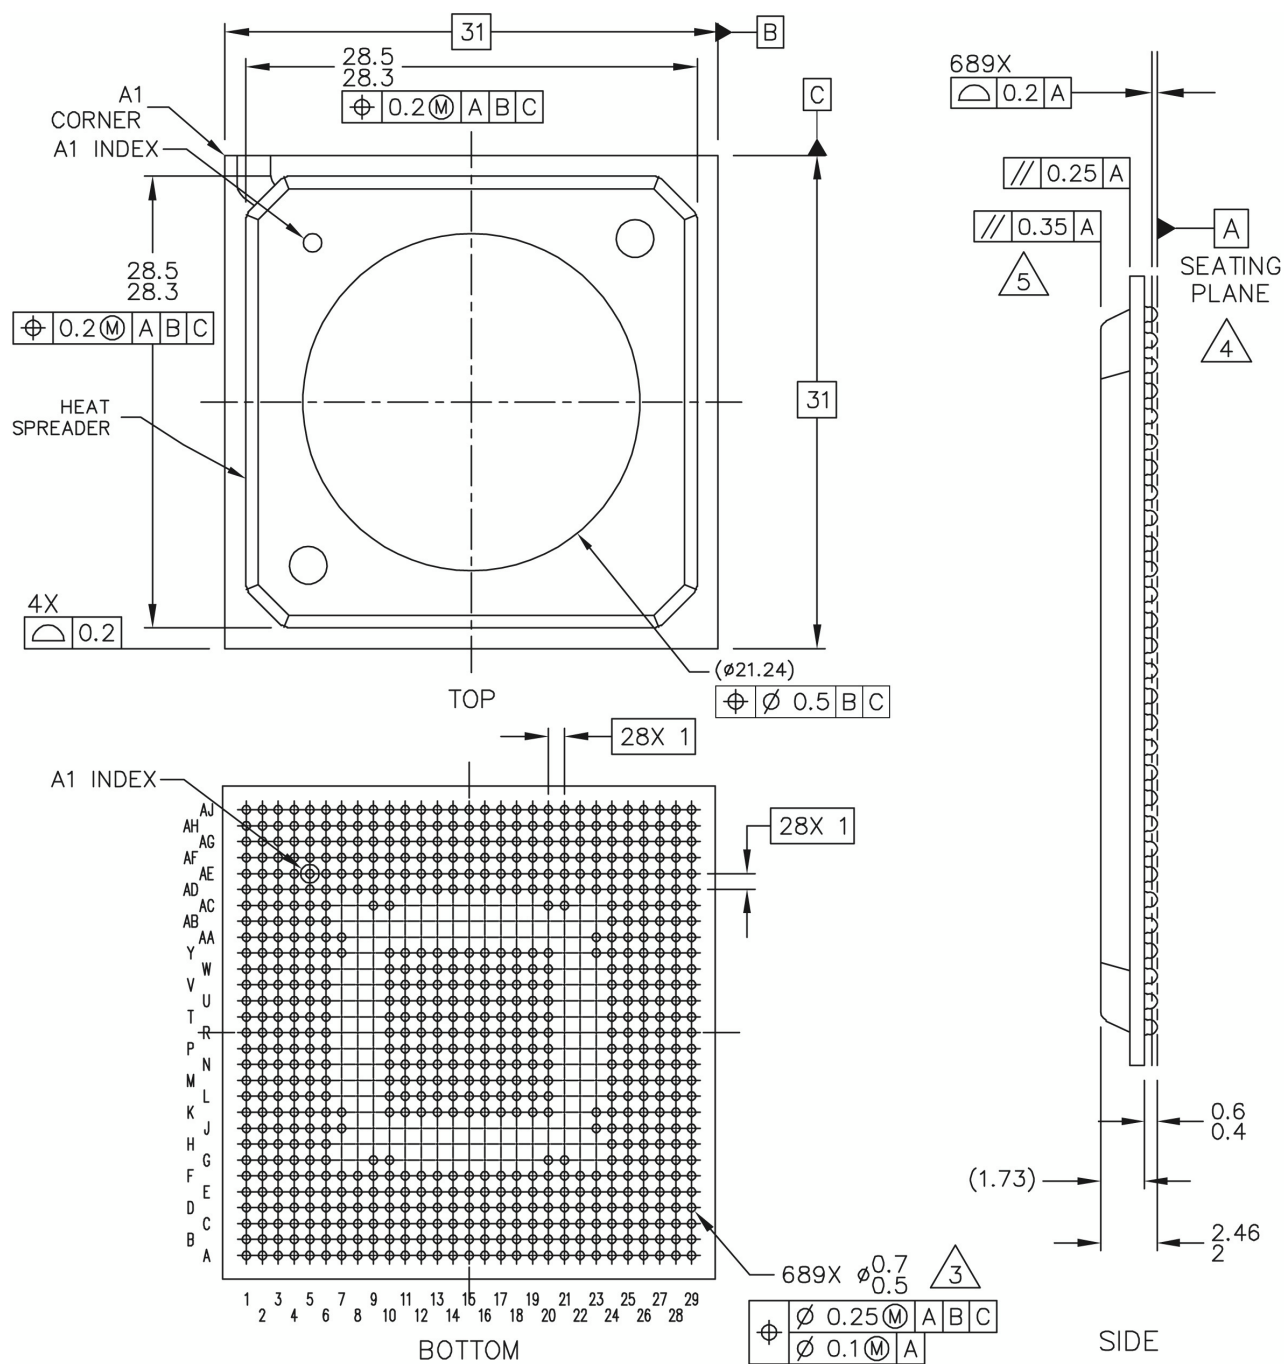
Mechanical Dimensions and Bottom Surface Nomenclature of the TEPBGA II
